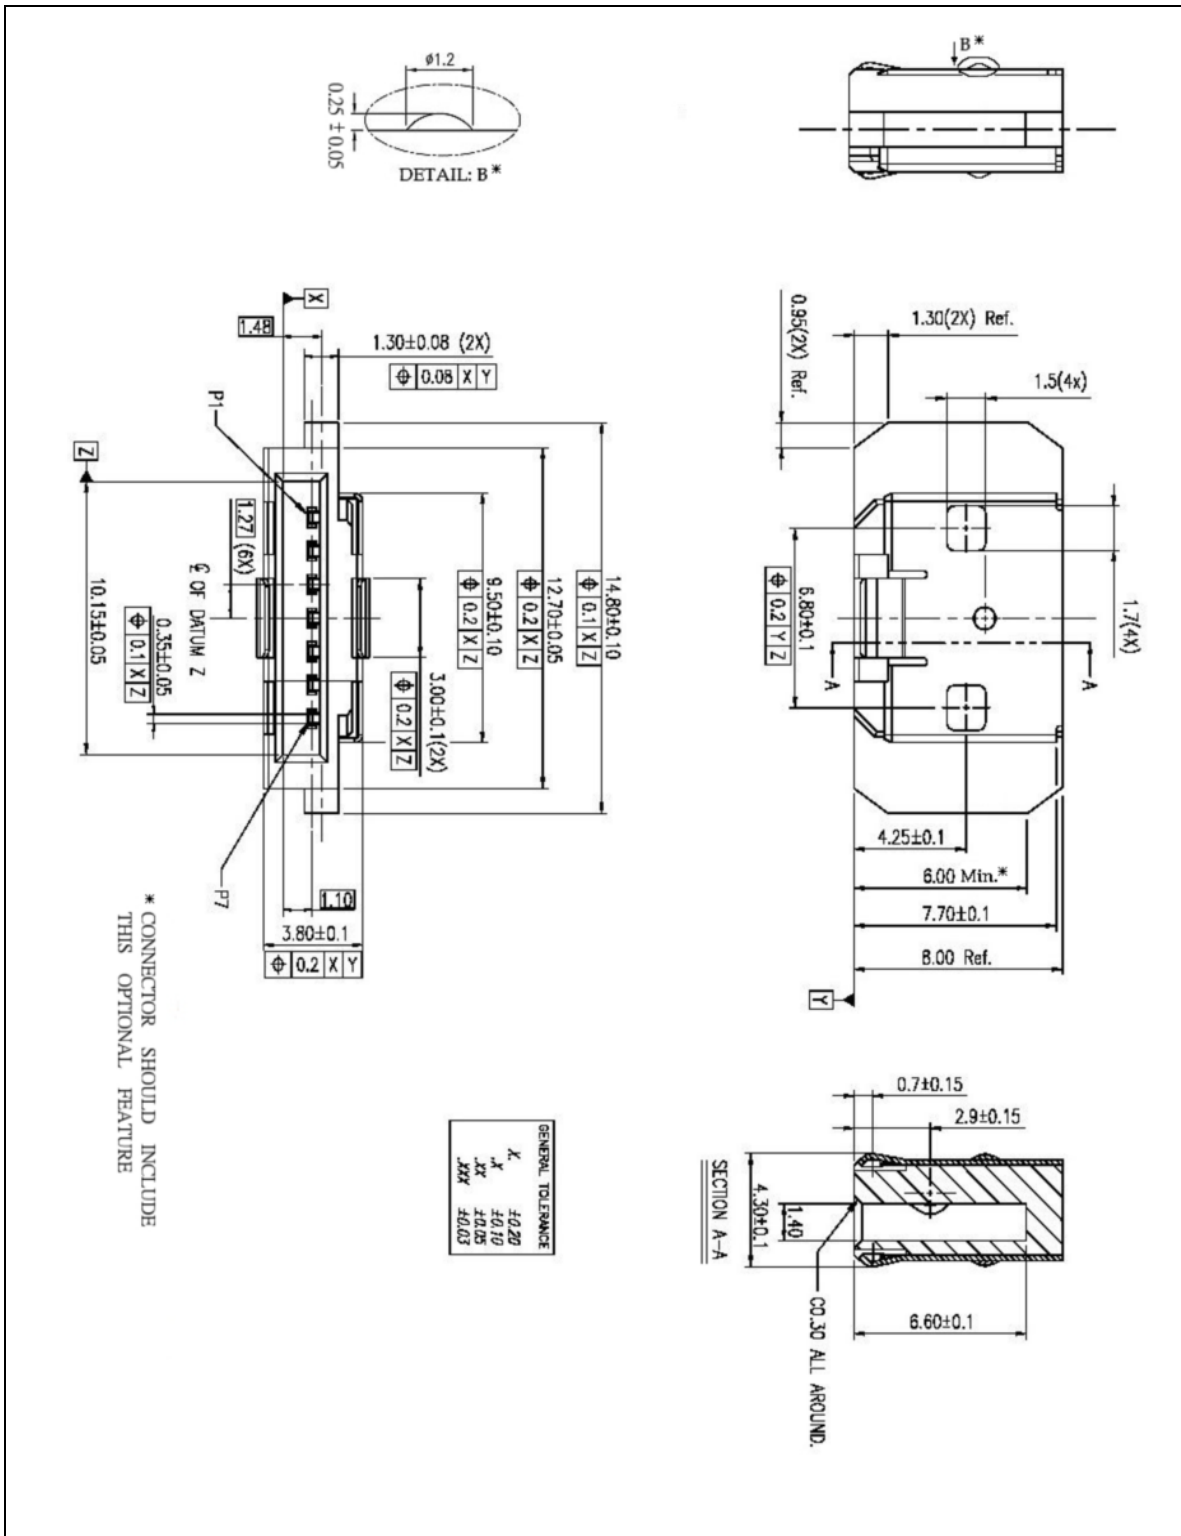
Mechanical dimensions of External Serial ATA cable receptacle assembly
